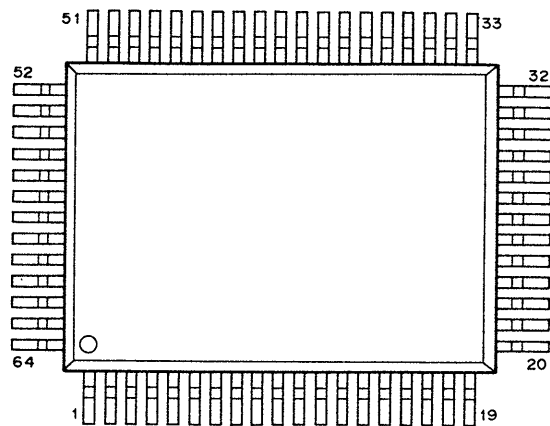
μ PD65006GF-325-3B8 Ext. View
